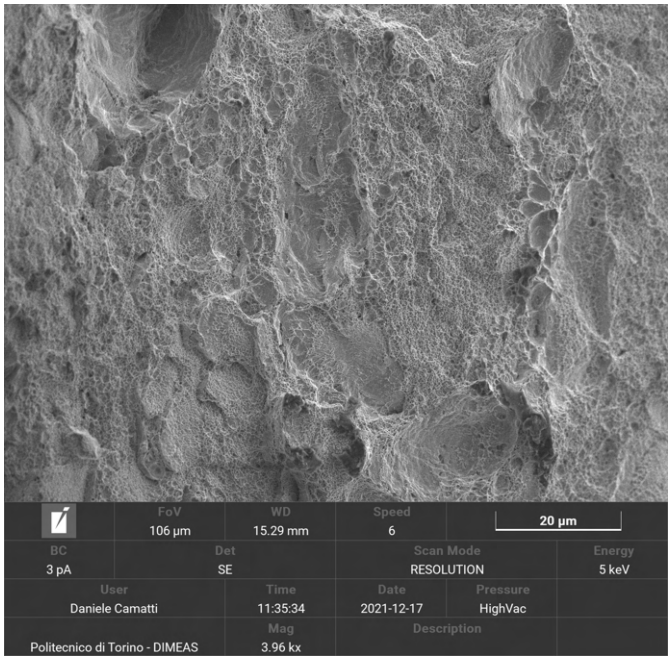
SEM magnification of the tensile traction fracture surface - 150°C test
